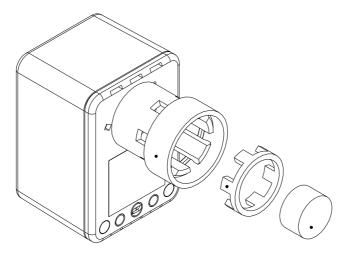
Placement of the holes for the cables and an illustration of the fitting of the drive adapter parts
